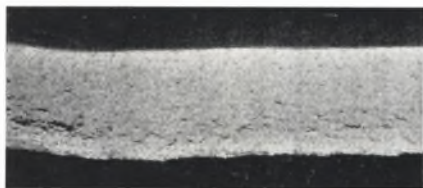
Fibrous Fracture of 1-Hole Cylinder. $\times 3$.
